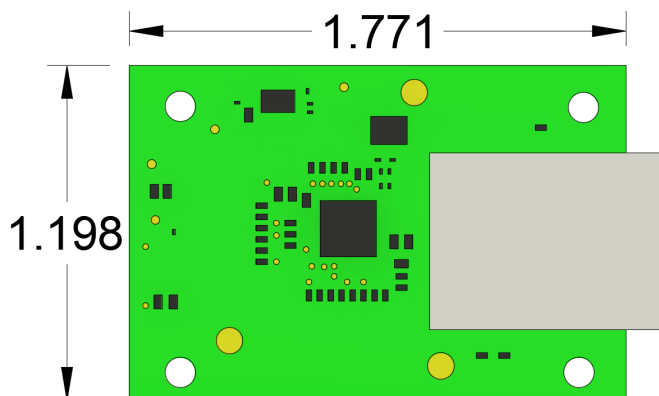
Industrial Ethernet PHY Add-on Board Dimensions
